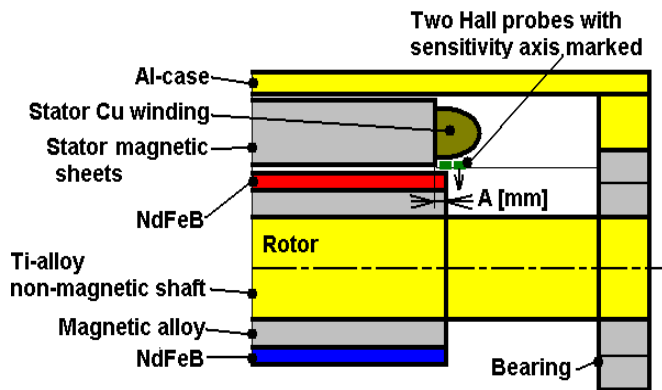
Schematic drawing of the Hall sensor placement during its qualification tests. The “A” dimension is a distance between the end of the rotor permanent magnet section and the beginning of the stator magnetic sheets section. The Hall sensors were placed close to the stator sheets.
